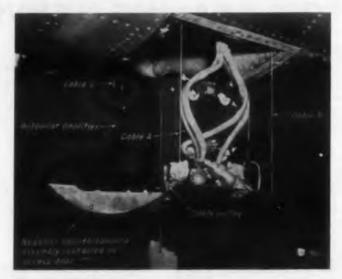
Neg ator assembly counterbalances 36-lb assembly in Republic's F-84G Thunderjet.
